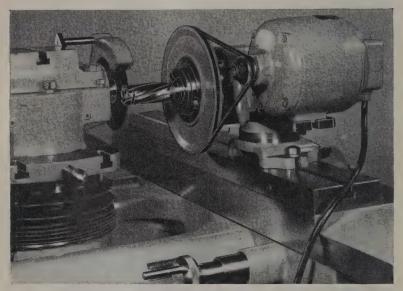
Cutting off the damaged end of a helical end mill.
